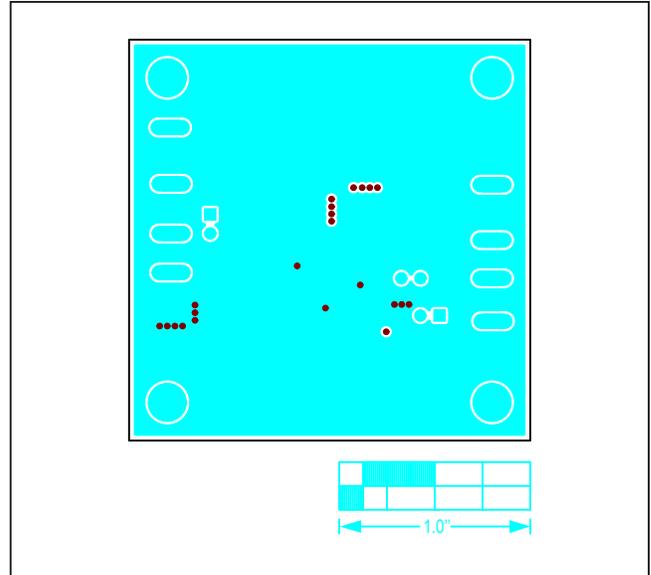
MAX17545 5V Output EV Kit PCB Layout—Inner Layer 1
